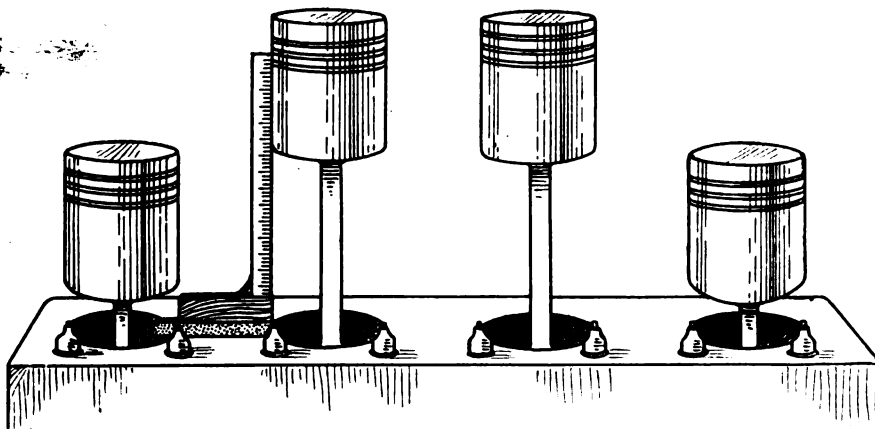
, ALIGNING PISTONS WITH THE COMBINATION SQUARE IS AN INACCURATE METHOD OF CHECKING UP PISTON ALIGNMENT
